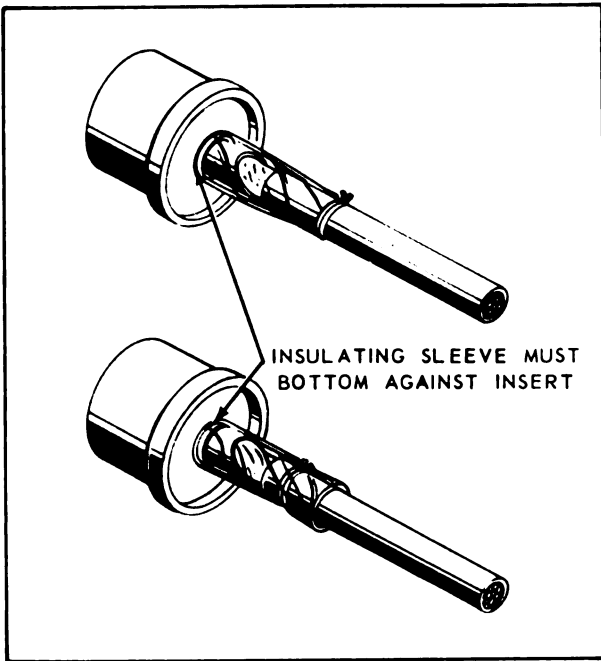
Insulating Sleeve Bottomed Against Insert
